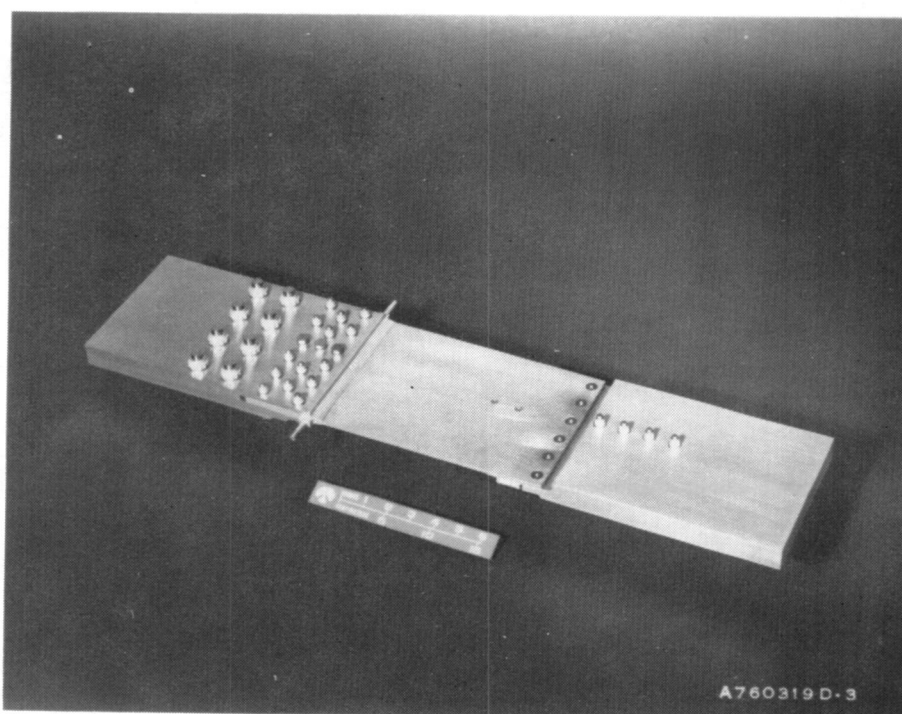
EPISTS Moldline Side of Completed Fatigue Specimen
